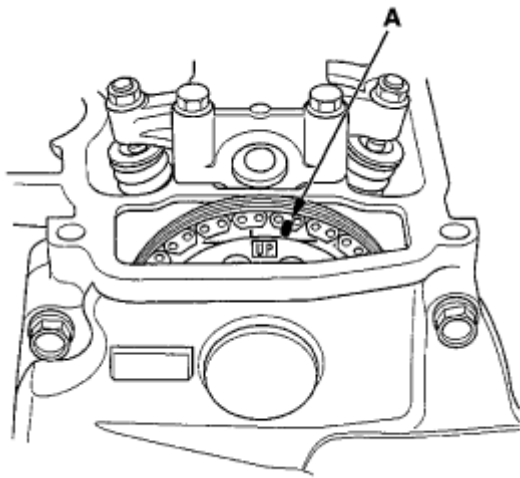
Making Reference Mark Across Camshaft Sprocket And Cam Chain
